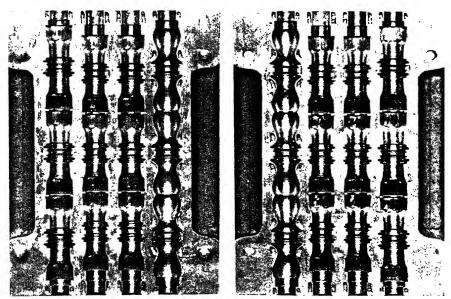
Unit-construction tube-blowing mold for brush handles. Mold requires press mounting for proper operation. Mold may easily be made direct-heated, with ports in the die plates, or steam and cooling water may circulate through the stock only.
